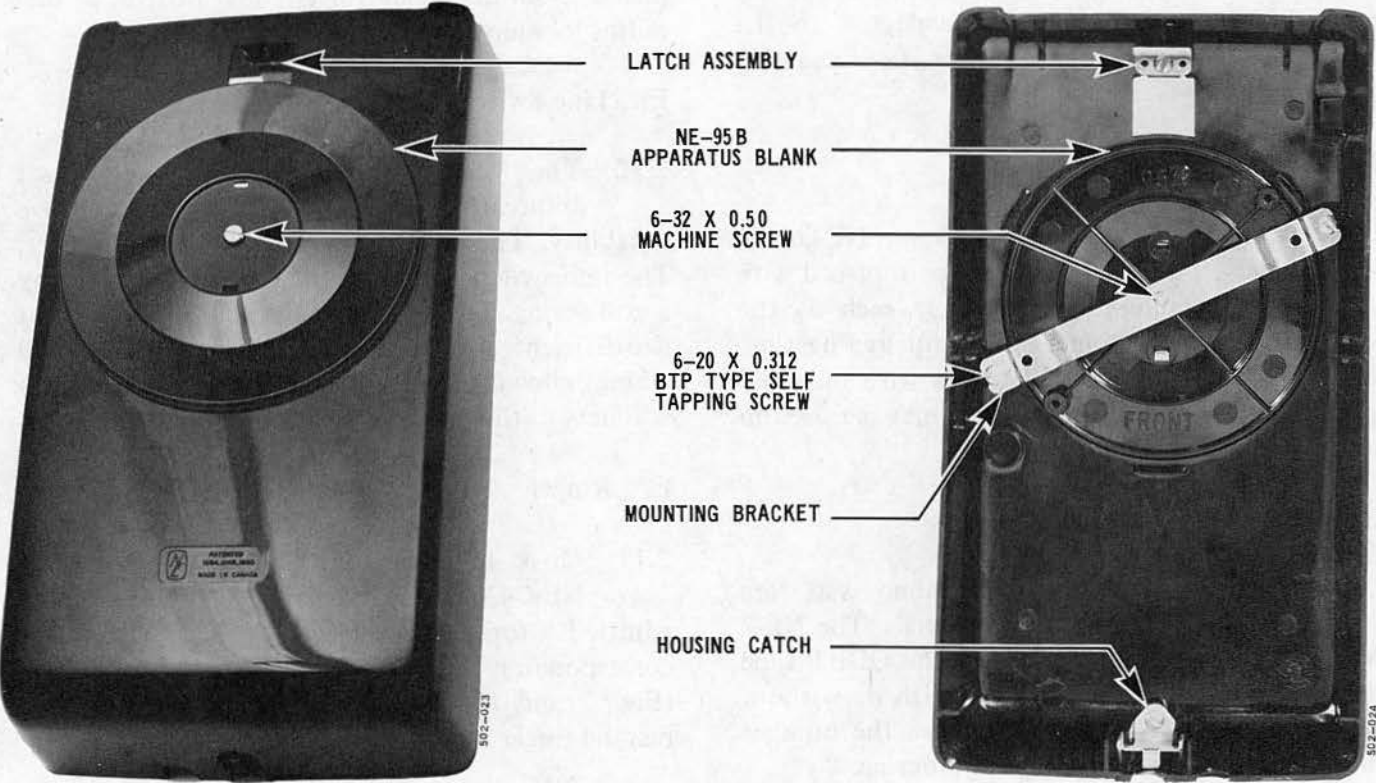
NE-554 Type Telephone Set Housing Equipped With an NE-95B Apparatus Blank
